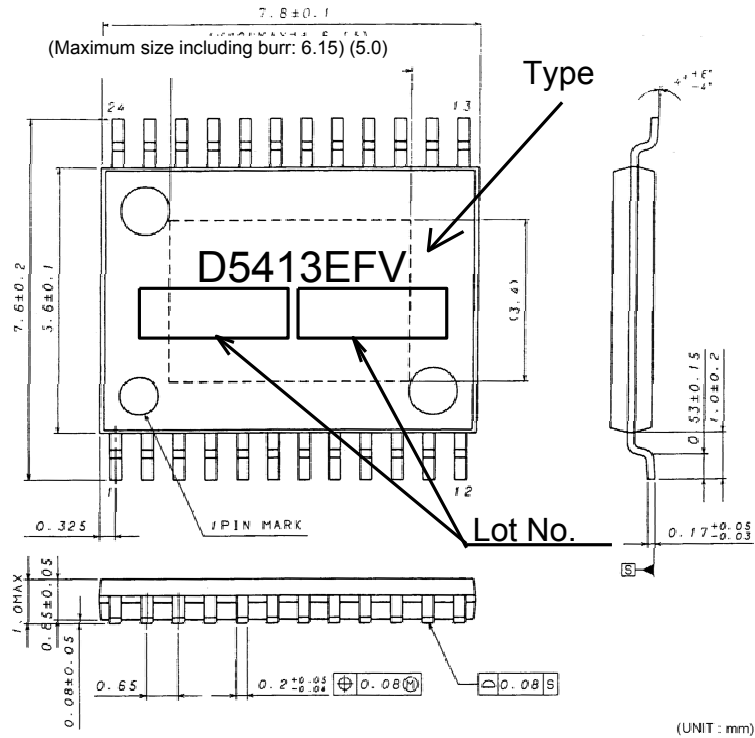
Outer Dimensions and Inscriptions of the HTSSOP-B24 Package
